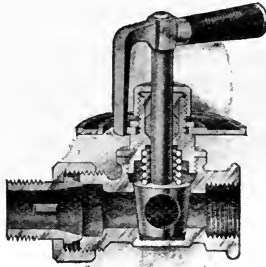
Radiator valve constructed to admit of permanently checking the circulation through it.
